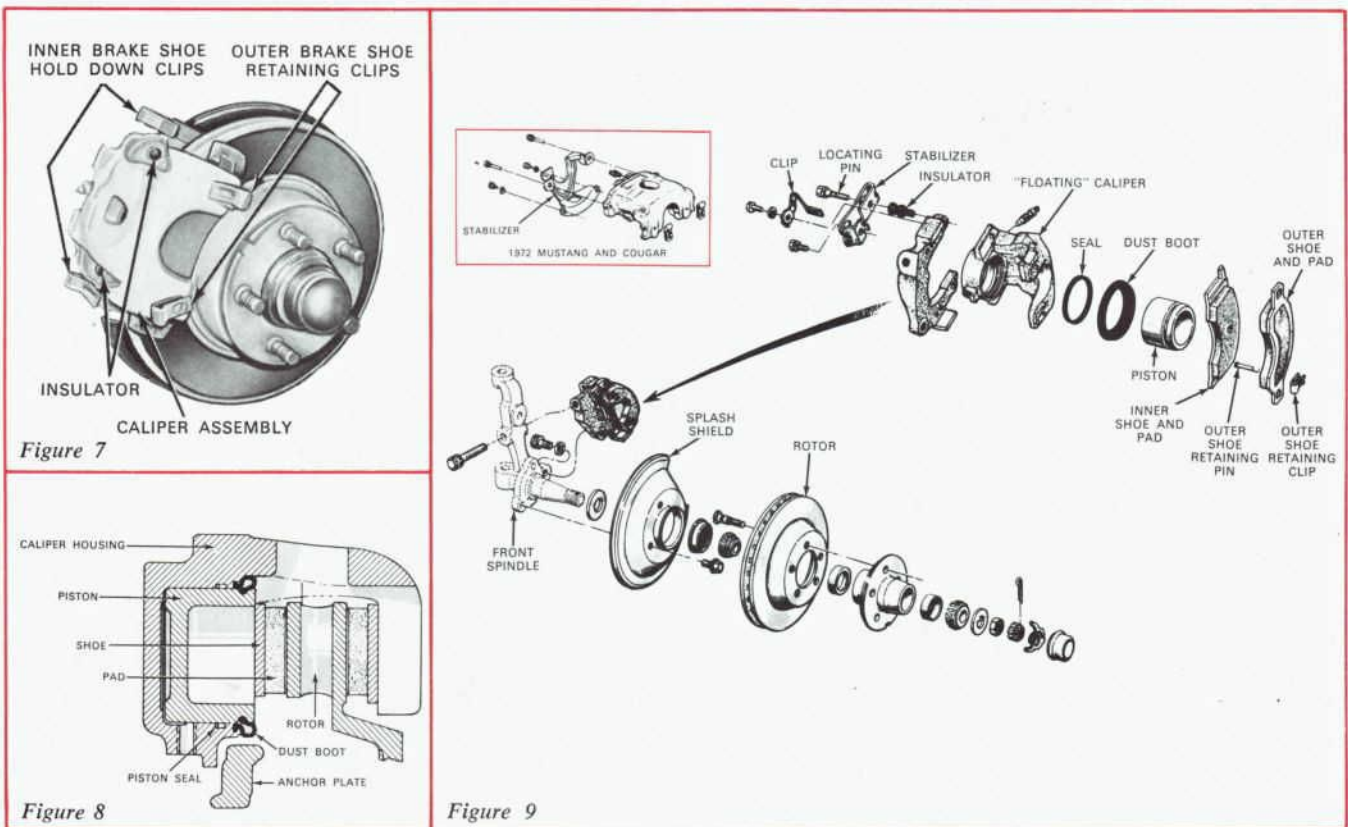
Here is the "floating caliper" type of disc brake in the installed position.
